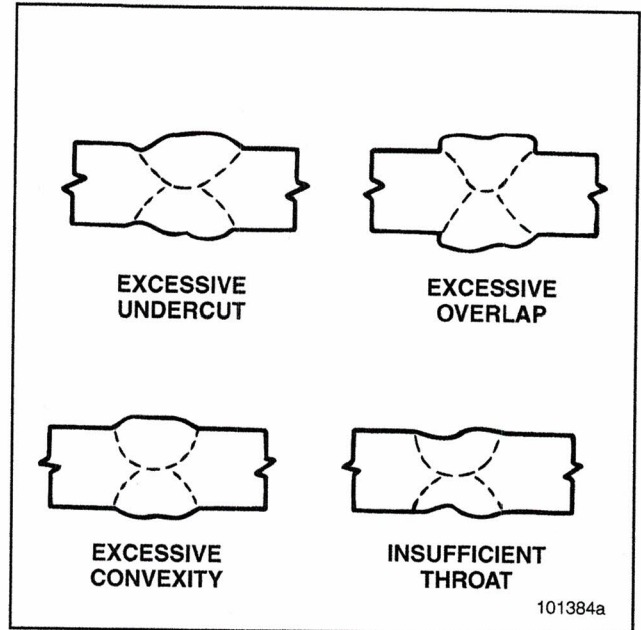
Unacceptable Butt Weld Profiles
